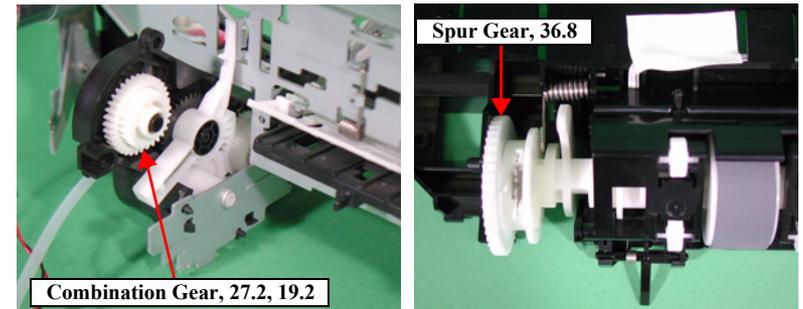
Spur Gear, 36.8 and Combination Gear, 27.2, 19.2
